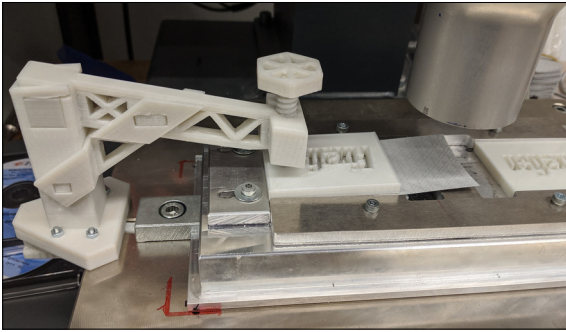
Positioning and fixation of the workpieces on the ultrasonic welding unit
